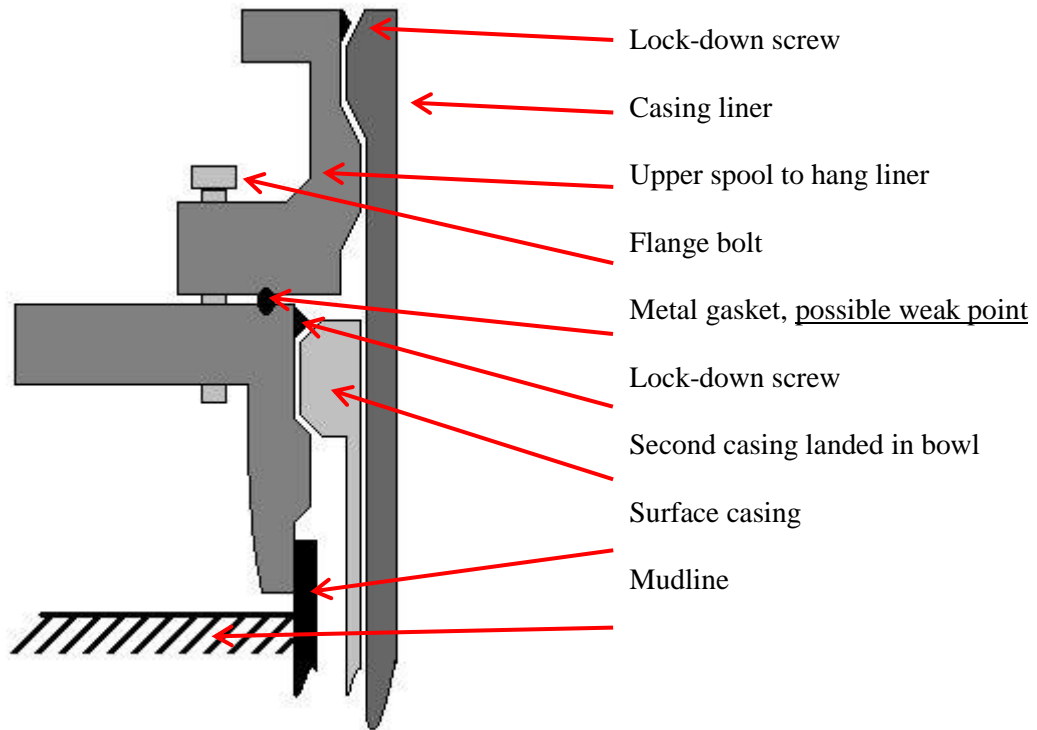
This cross-section of a typical wellhead details common components and highlights the gasket as the most plausible location of failure. The surface casing is likely not to fail where it is connected to the lower flange, because it is welded (joint not explicitly shown).
